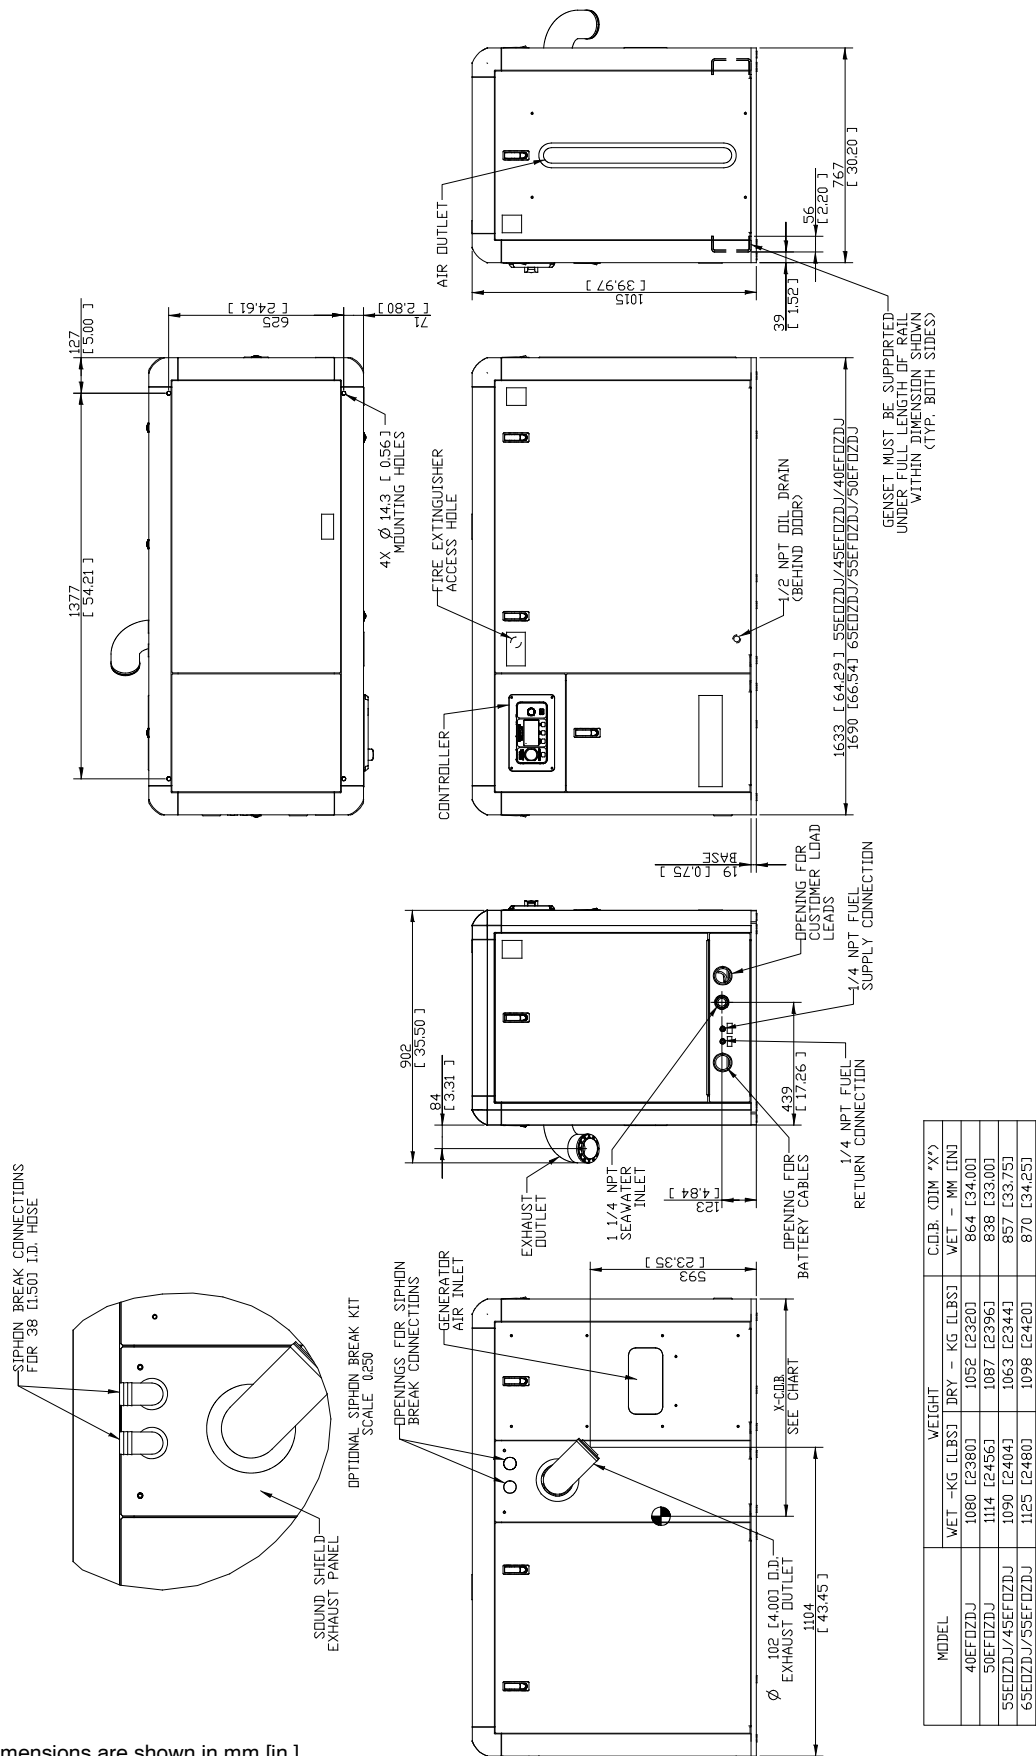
Dimension Drawing, 40EOZDJ & 33EFOZDJ (with Sound Shield)
